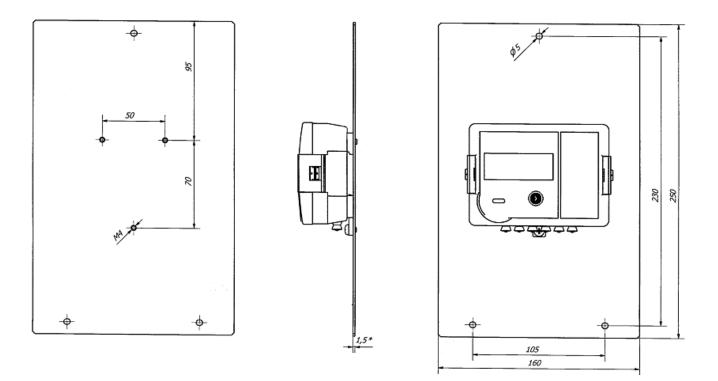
Adapter plate as shown in Fig. 8 of EN 1434-2:2007 for a wall-mounted installation of calculator.
